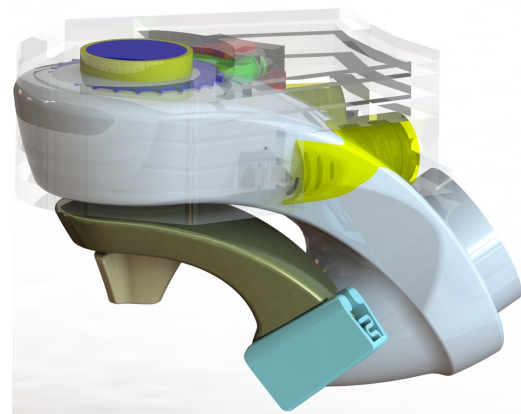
PneuScape with its housing, incorporated in segment 1. The motor sticks out from some parts of the segment.
